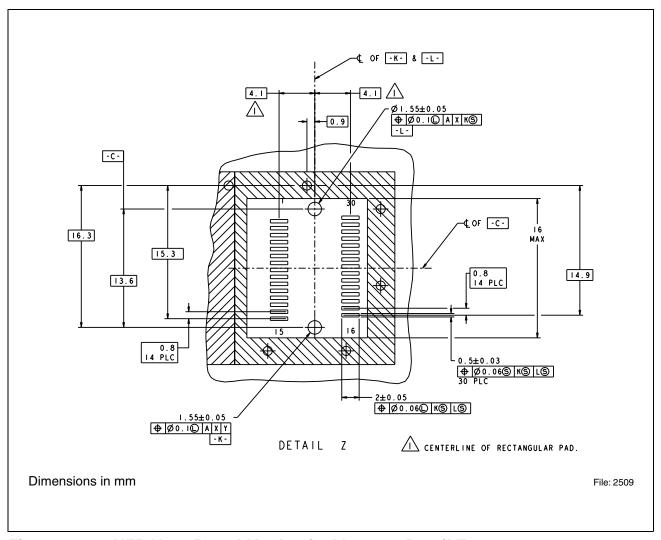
XFP Host Board Mechanical Layout, Detail Z
